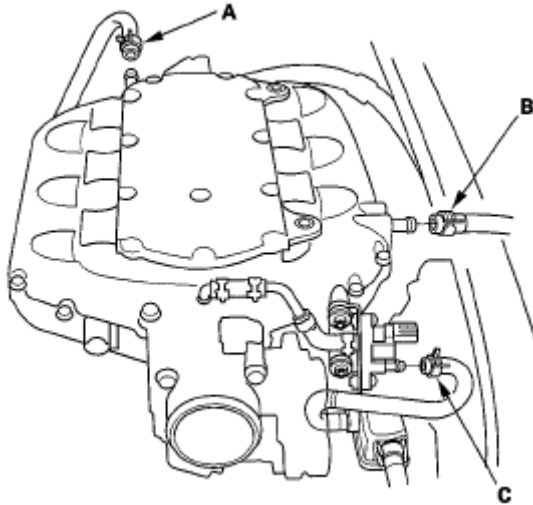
Identifying Positive Crankcase Ventilation Hose, Brake Booster Vacuum Hose And Evaporative Emission Canister Purge Hose
